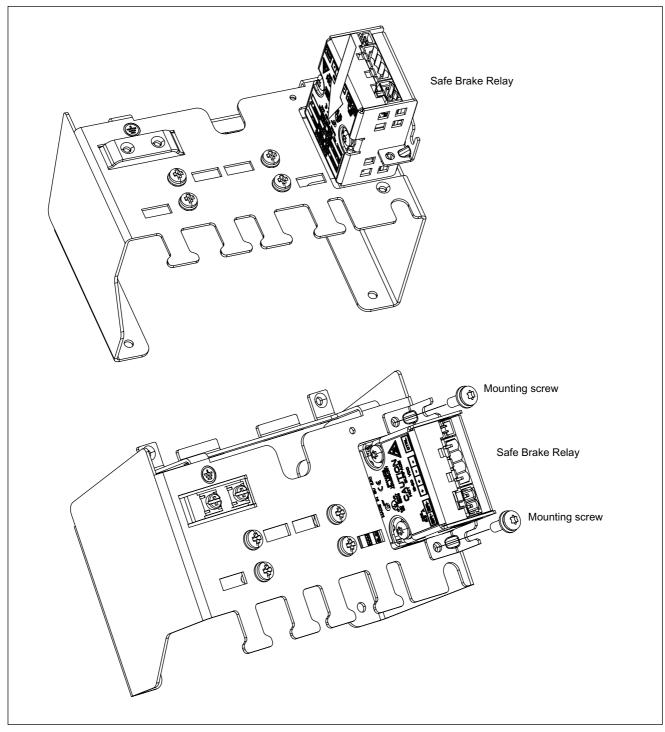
Mounting the Safe Brake Relay on the Screening Kit (frame sizes FSB and FSC)
